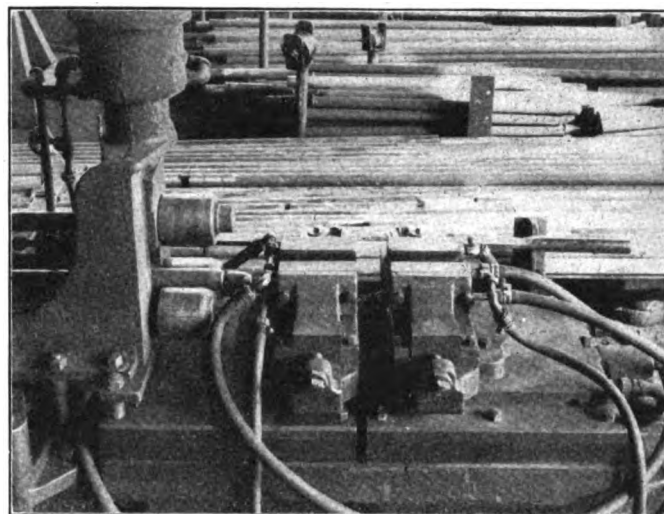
Three-point roller as applied to modern electric flue welding machine
